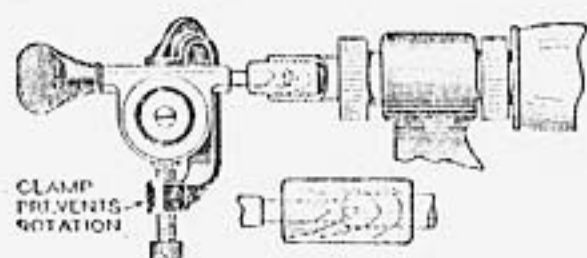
REVOLUTION COUNTER PLUGGED IN REAR END OF LATHE SPINDLE
